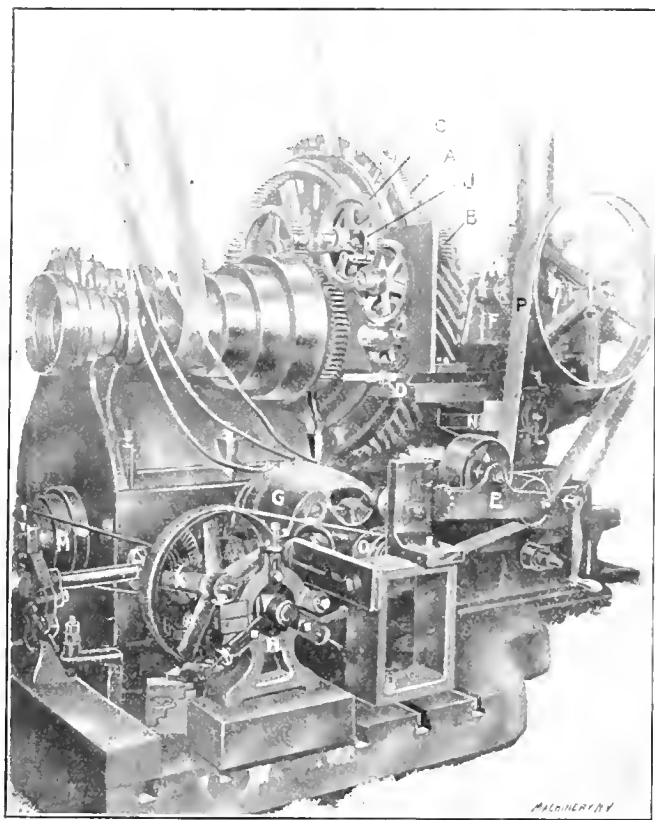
New Haven Lathe, Rigged up to Cut Spiral Gears.
